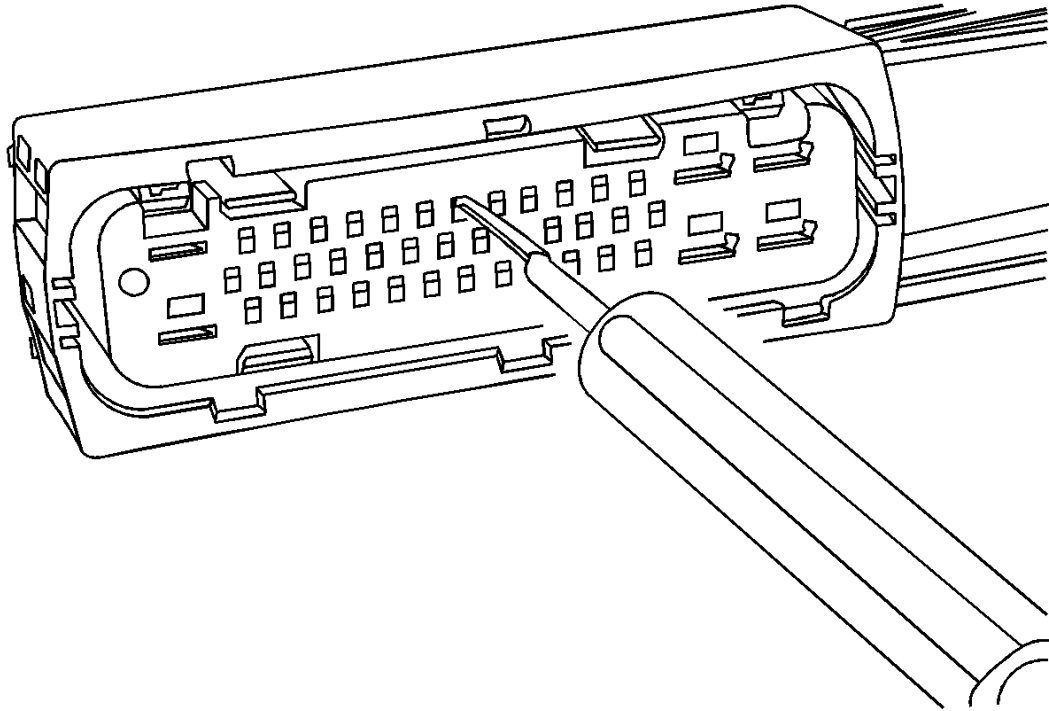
View Of Release Tool Being Used For Smaller Terminals
